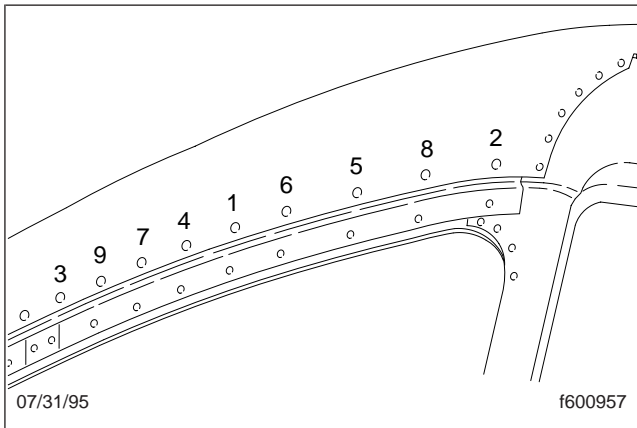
, Installation Sequence for Front Roof Cap Fasteners (left side)
